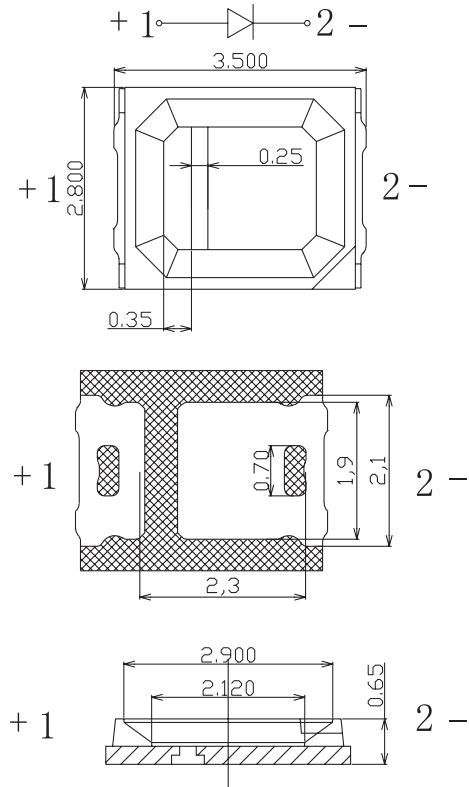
Mechanical dimensions for L128-xxxxRA35000A1.
